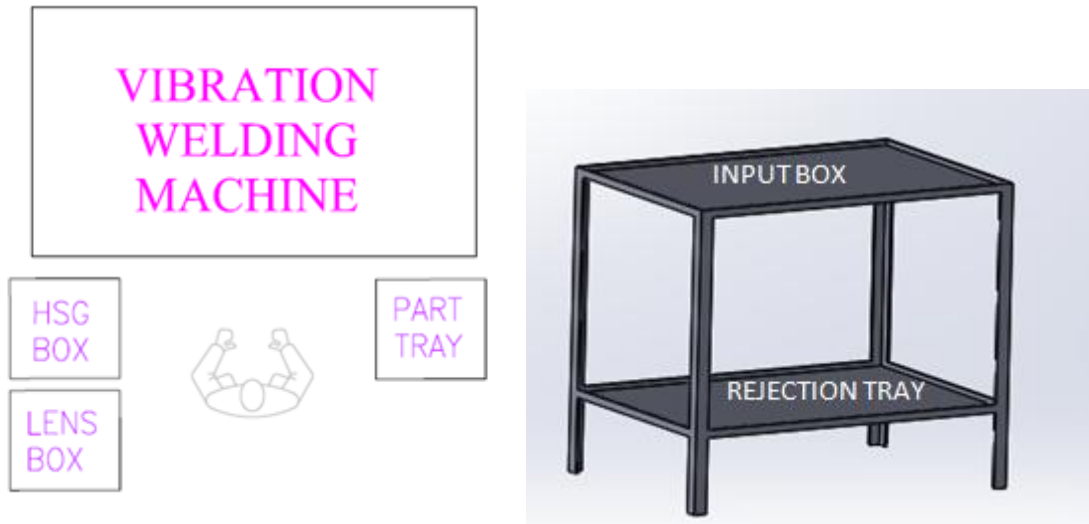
Standard welding stage Figure 94: Table for lenses and preassembly parts
